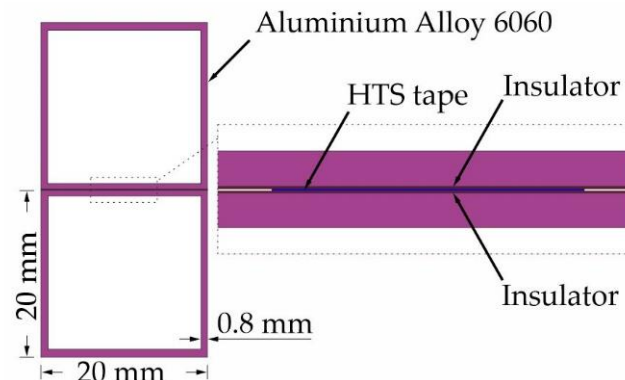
A cross-sectional view of the HTS tape between anodised aluminium blocks.
